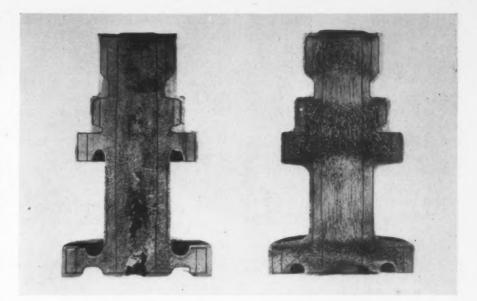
Etched Macro-Sections of Cast and Forged Gears
